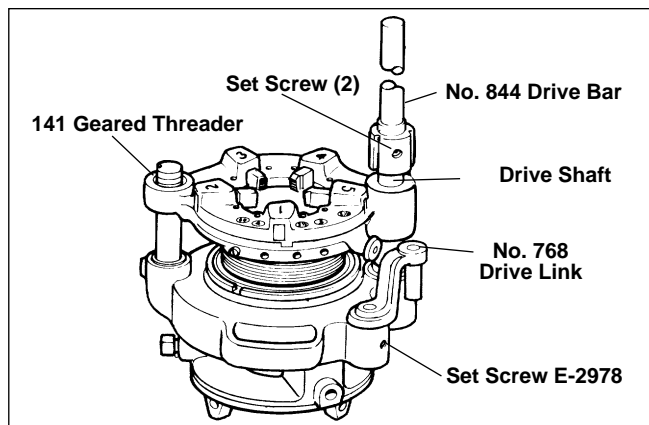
No. 141 Geared Threader with No. 844 Drive Bar Installed
